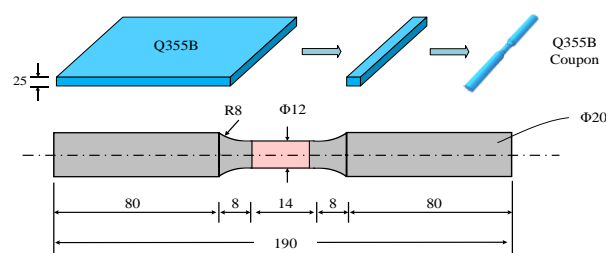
Dimensional diagram of Q355B specimen (unit:mm)
